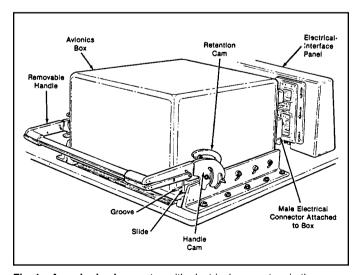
An avionics box mates with electrical connectors in the rear and is locked in position on the cold plate when it is installed with the latching mechanism.
